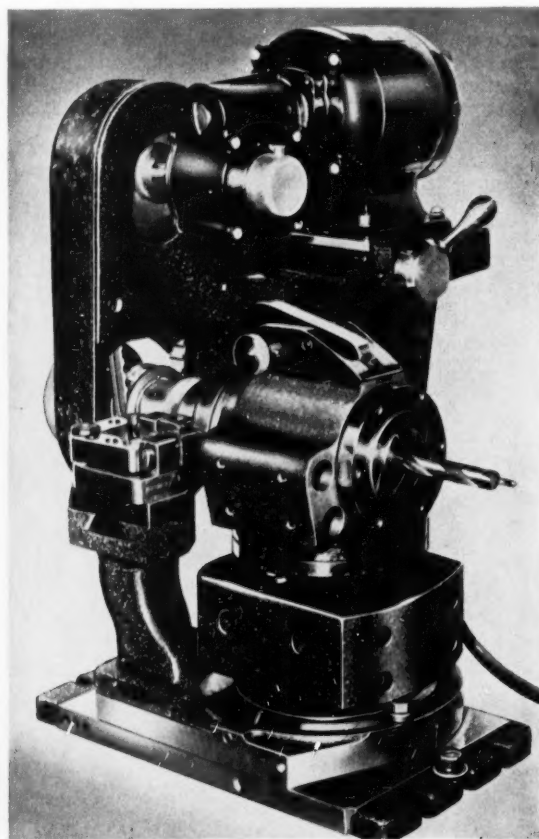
"Royal Oak" form-relieving fixture equipped with direct-current 110-volt gear reduction driving motor unit
